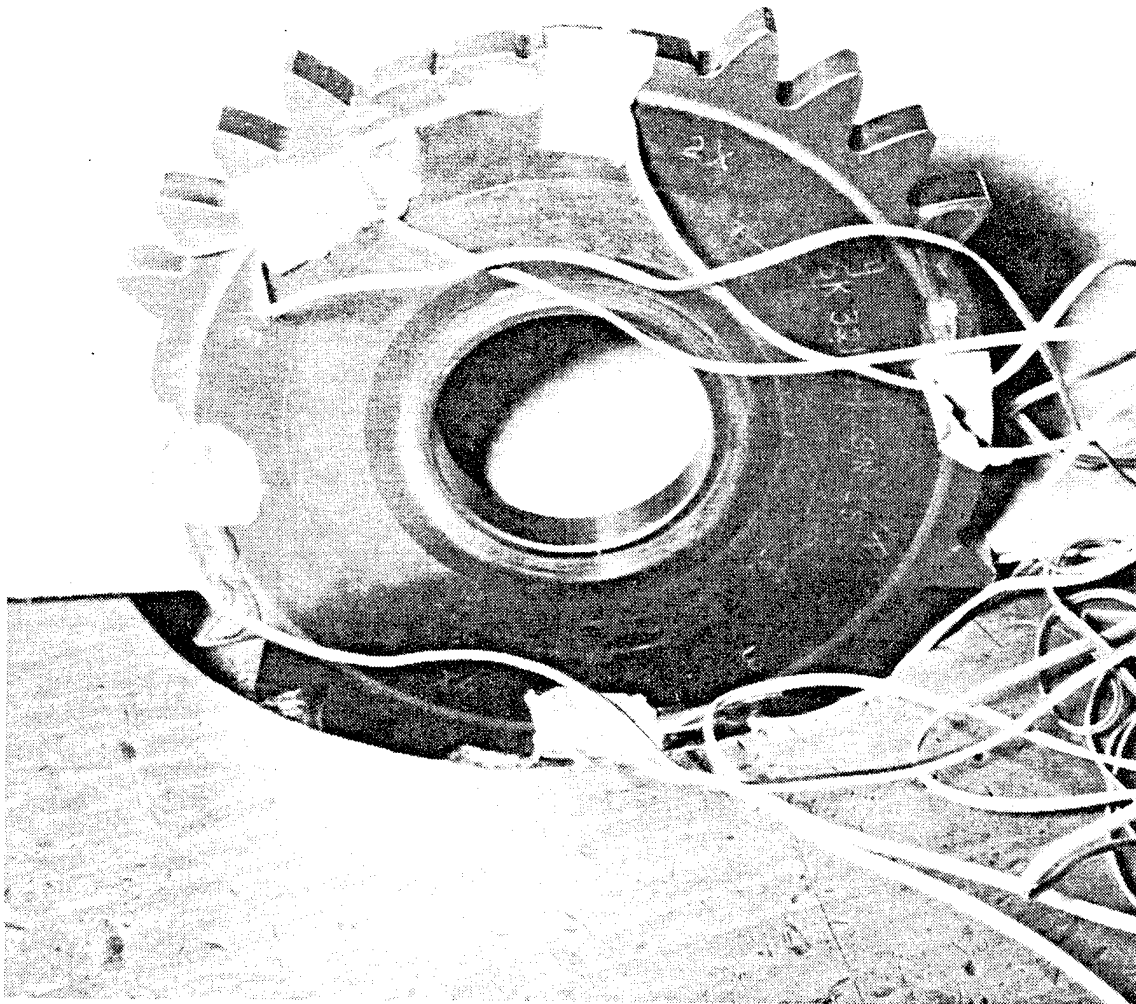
Single-Tooth Bending-Fatigue Test Setup
